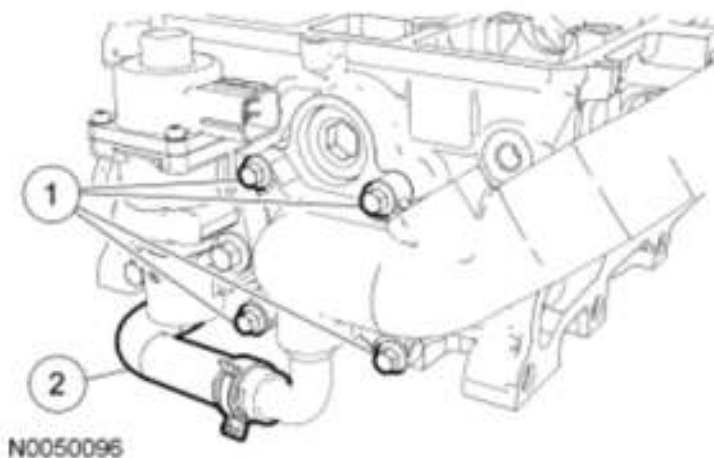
Identifying Rear Coolant Outlet Pipe Bolts
